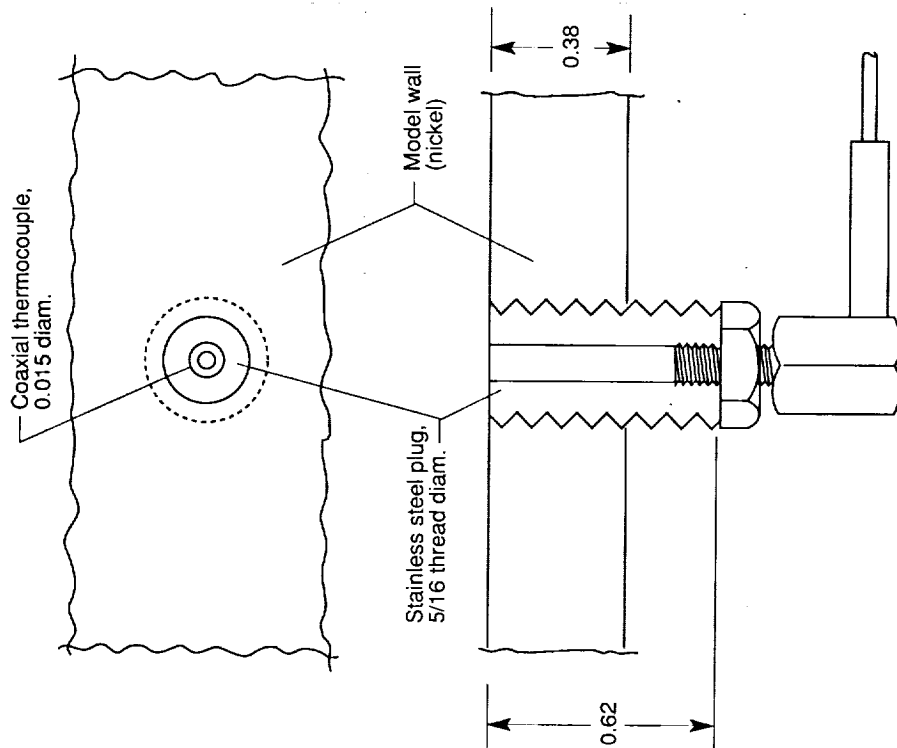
Coaxial thermocouple installation. All dimensions are given in inches.
